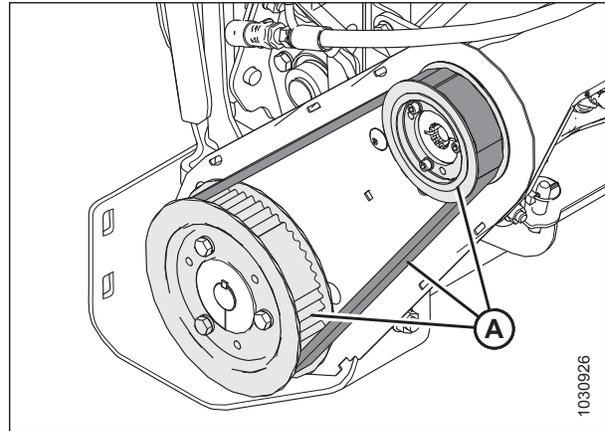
Drive Belt and Pulleys – Conditioner Drive Motor
